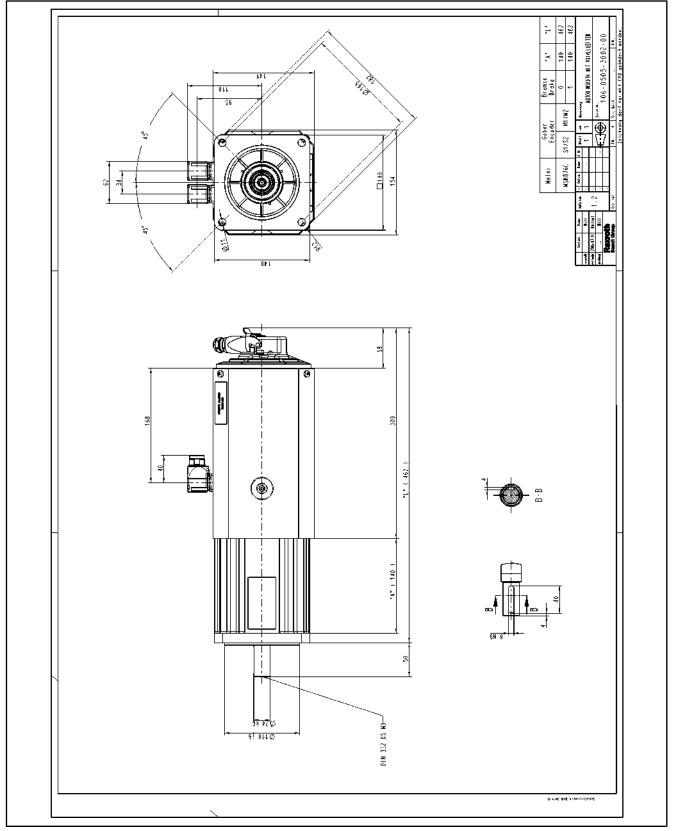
Dimension sheet MSK076 with axial fan unit
